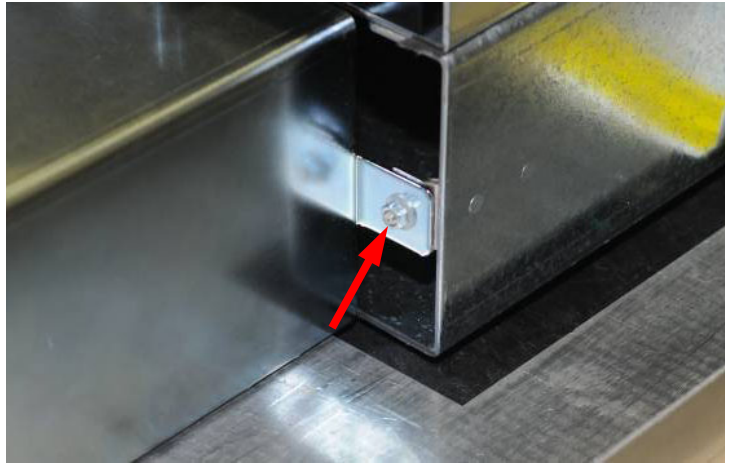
Cable-clamp bracket mounted on mounting tab, right side of E2 frame.
